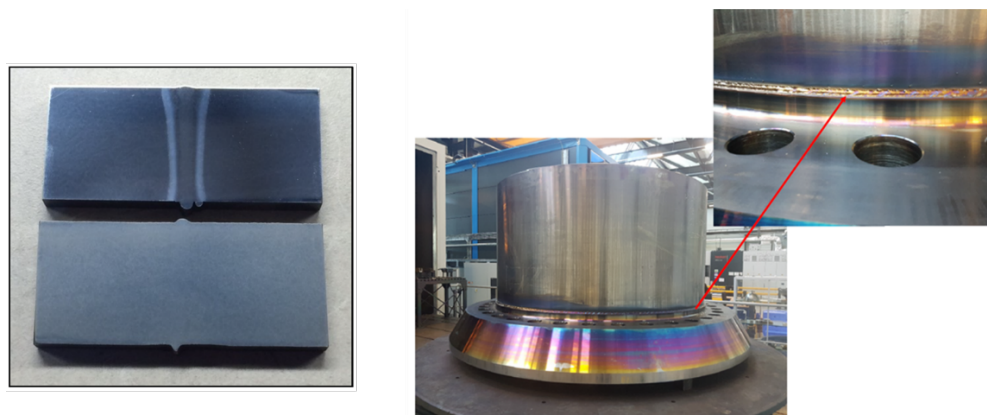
Examples of EBW. Left: an electron-beam weld before (top) and after (bottom) heat treatment. Right: Lower flange shell mockup with EBW, ~1.8 m (~6 ft) diameter, welded in 47 minutes. Image courtesy of EPRI, used with permission. (Gandy et al. 2018).
